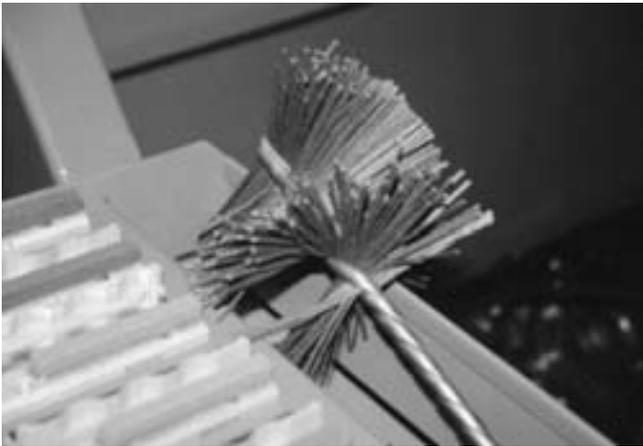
To achieve a finer surface finish, use a soft hone that is made from nylon bristles with impregnated abrasive. This hone is ideal for engines using low tension piston rings and provides a smooth surface that allows the rings to seal immediately.
